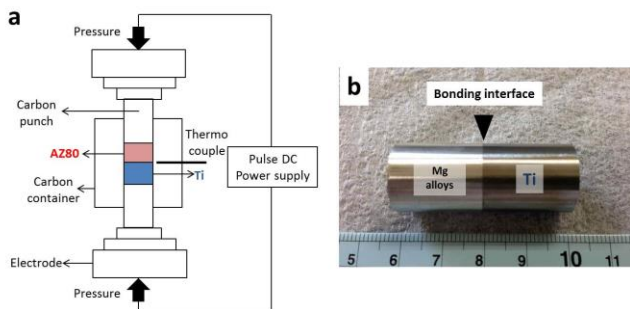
Schematic drawing of component arrangement inside SPS chamber a) and successful bonded material b).
